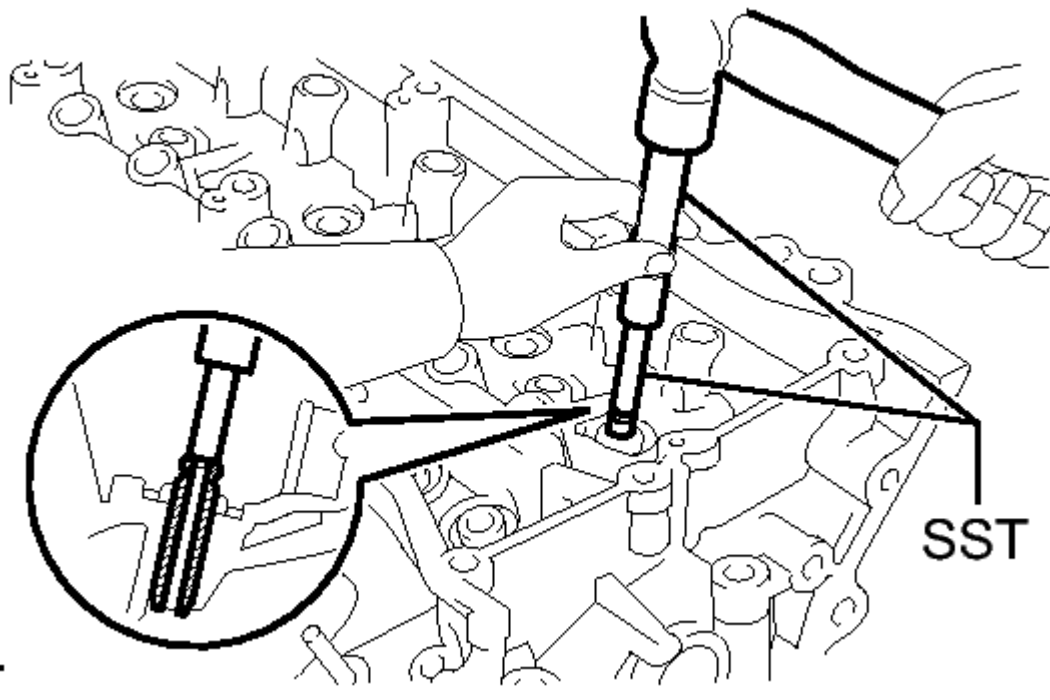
Identifying Exhaust Valve Guide Bush, SST And Hammer
